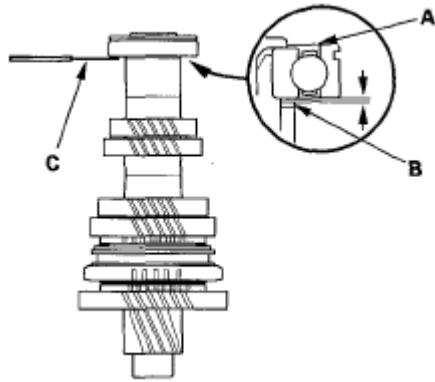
Measuring Clearance Between Old Bearing And Shim
